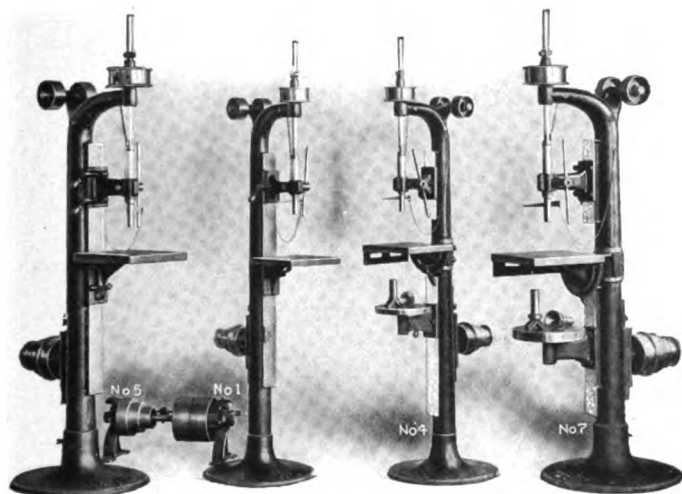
No. 1, 4, 5, 7 Plain Bearings, Single Spindle, Sensitive Drilling Machine
